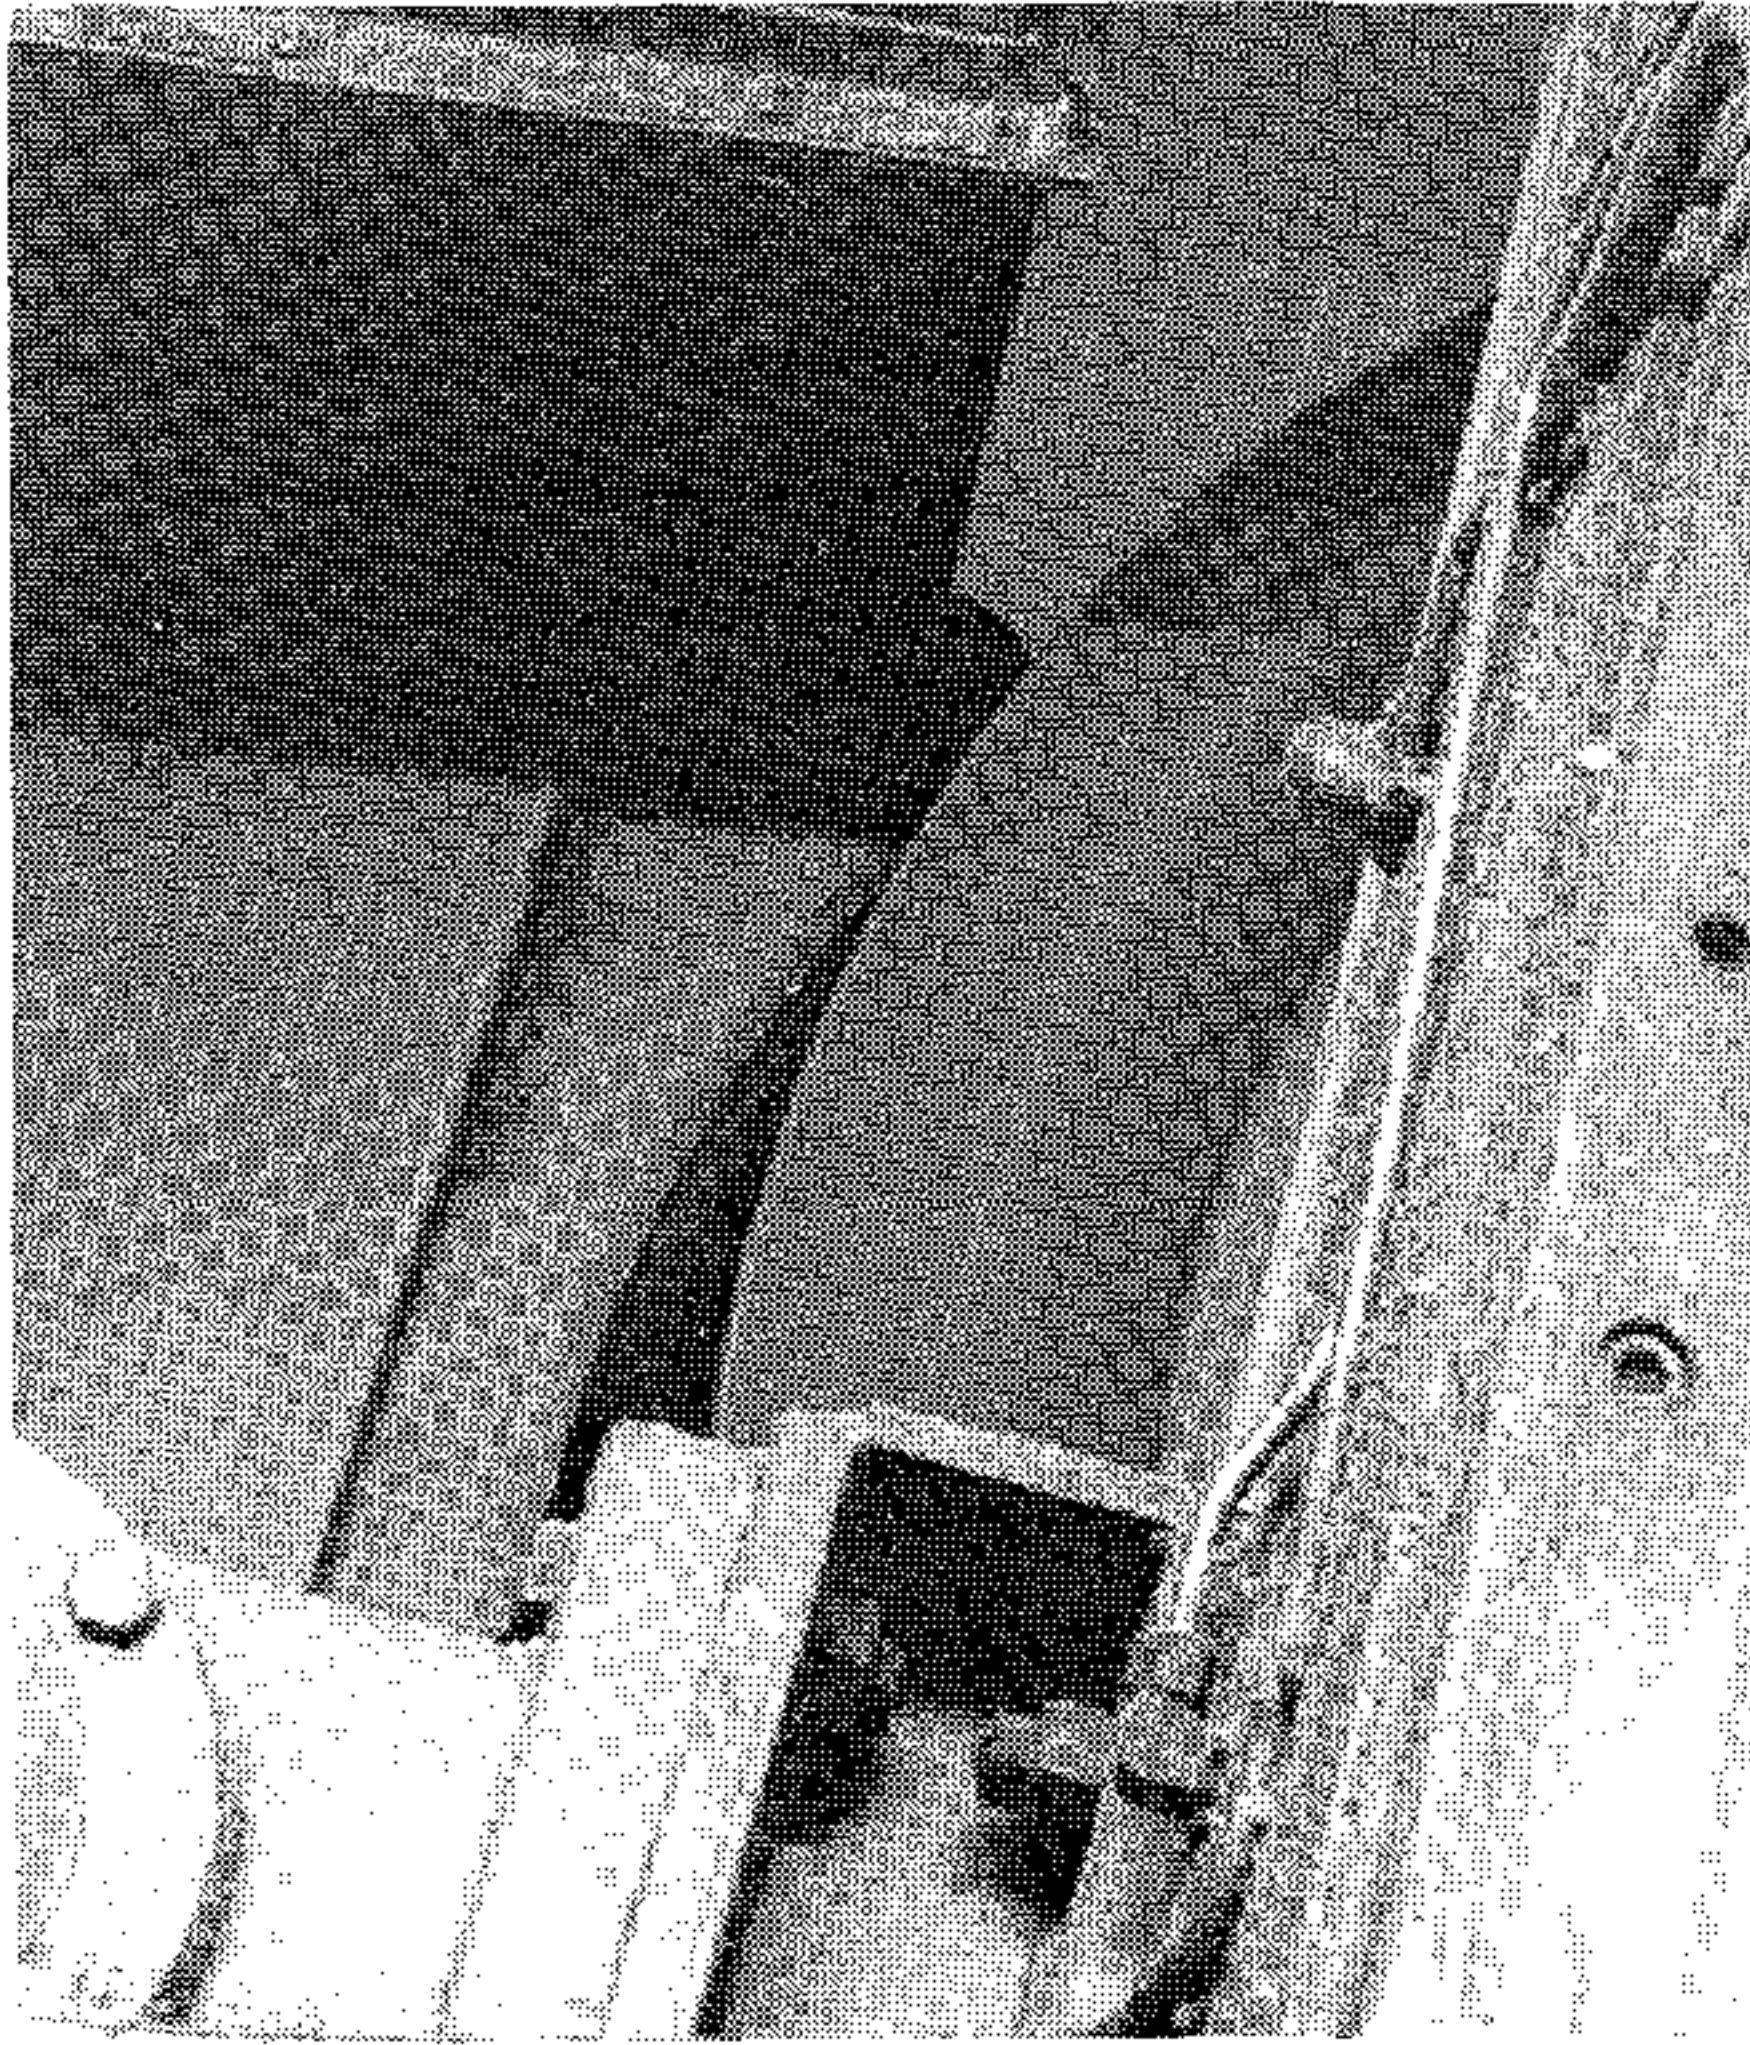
A Brüel & Kjær accelerometer mounted on the bearing housing of one of the paper-machine's drying cylinders
